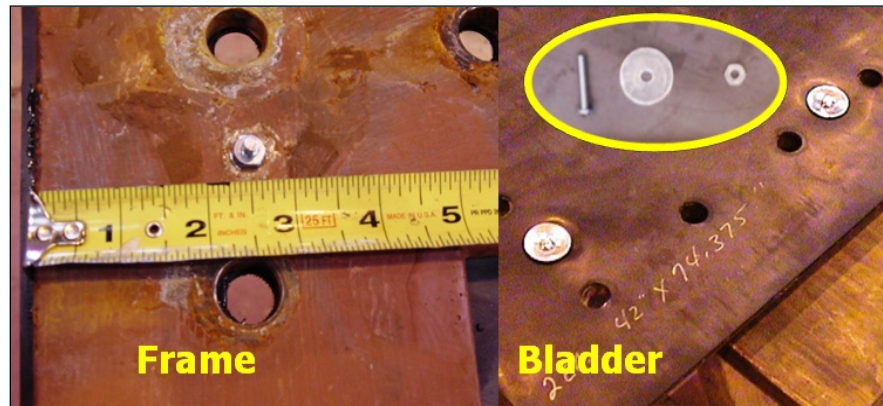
Use screw, washer, and nut to bolt membrane to steel frame. The nut should be on the steel side, and the washer and screw head should be on the membrane face.
